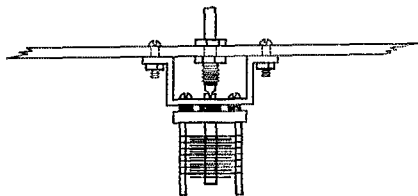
Drawing of the bracket-bearing assembly that permits knob control of short-shaft variable capacitors.
